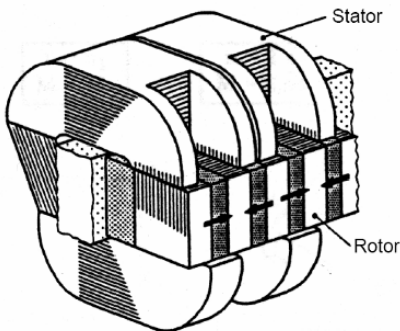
Double-sided, single-winding TFFM machine with C-core arrangement
